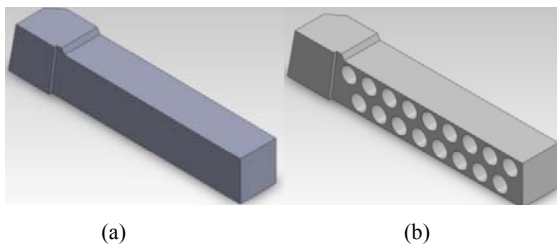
3D- model of the cutting tools in SolidWorks: (a) standard cutting tool; (b) cutting tool with horizontal holes arranged in a chess-board pattern (\varnothing 10 mm)
